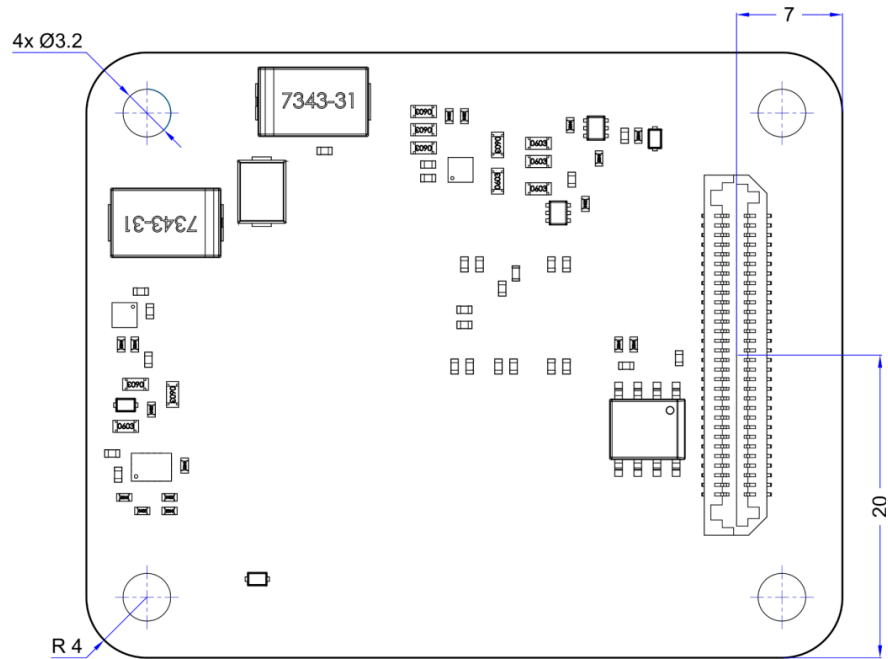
Toradex DSI to LVDS Adapter Dimensions (mm) - bottom side, bottom view
